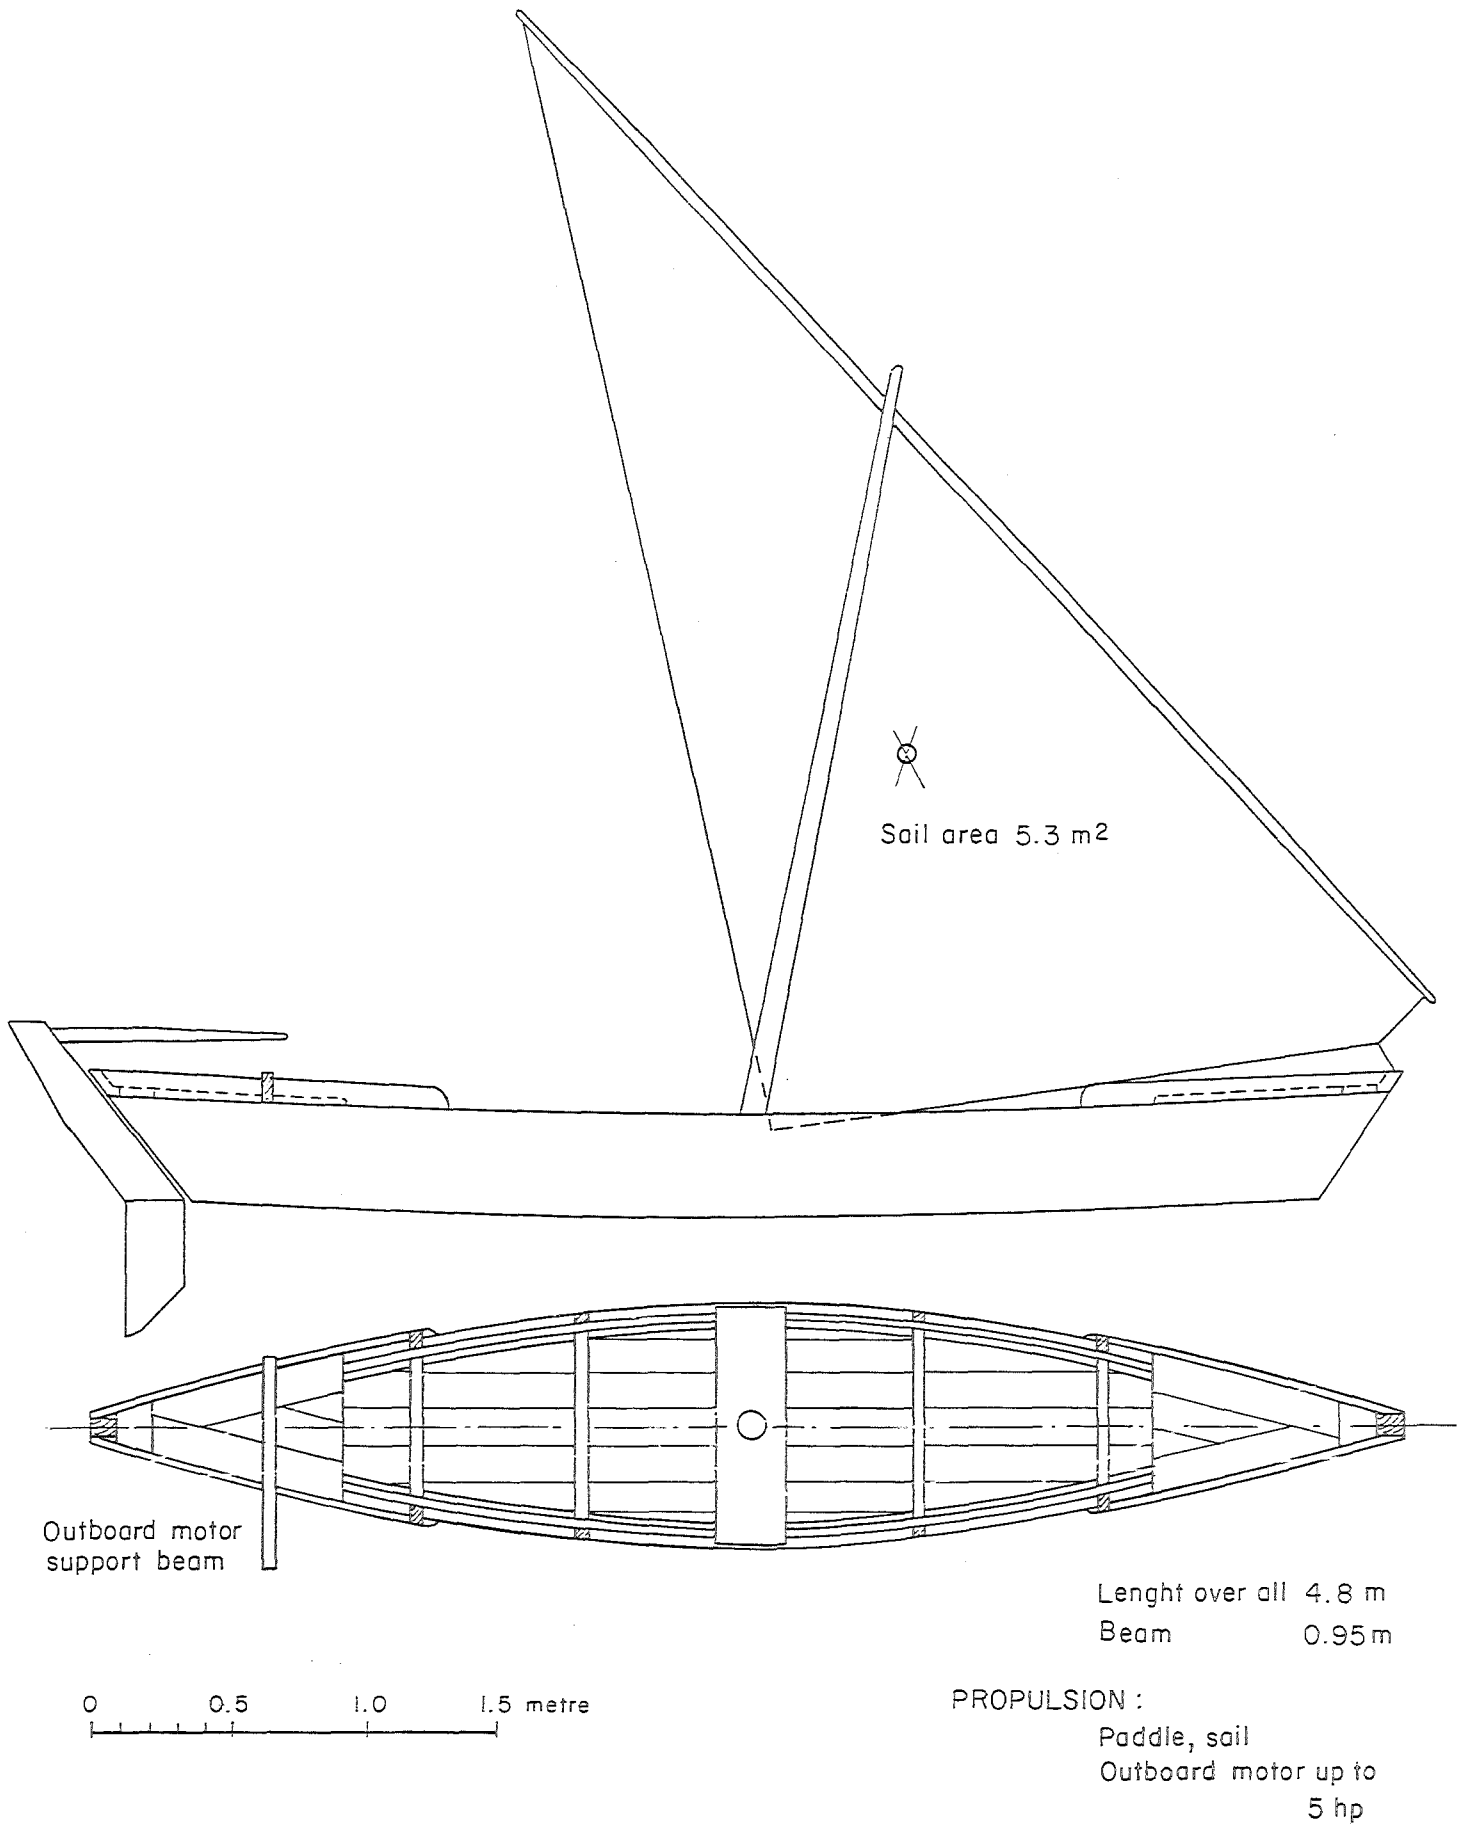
Layout of 4.8 m canoe for 1-2 men
